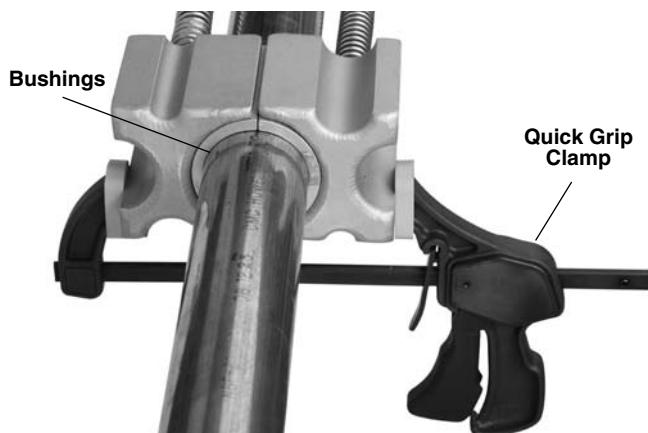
Attaching Freeze Heads Using Quick Grip Clamp
